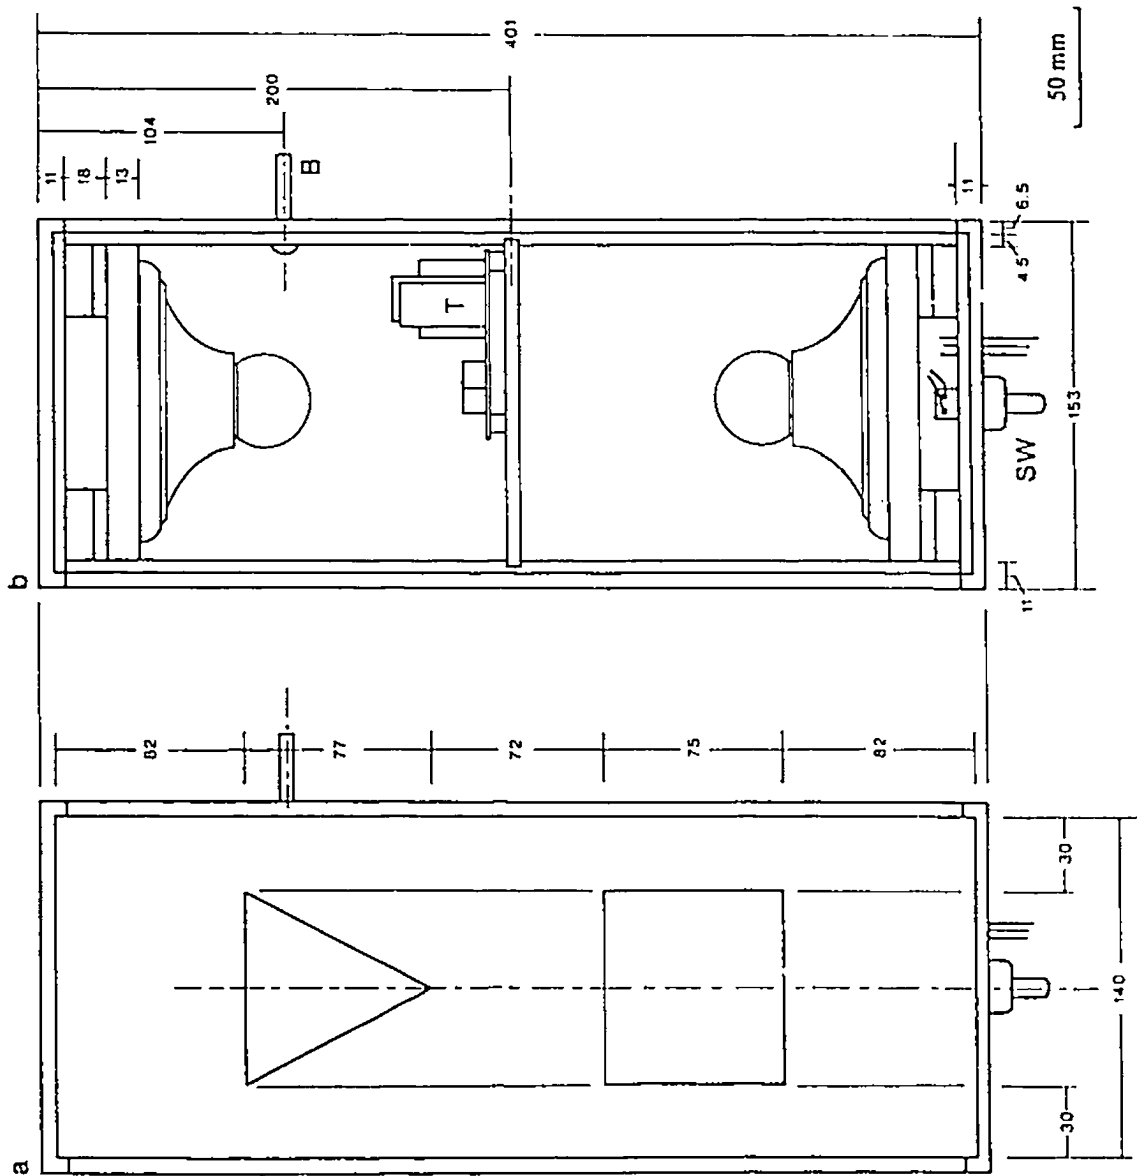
Construction details of *Wet Walk* lap pacer.
